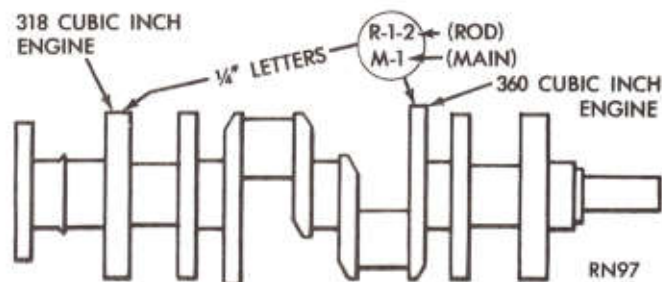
Location of Crankshaft Identification on No. 8, Counterweight
